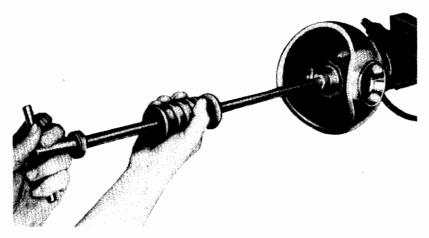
Axle Shaft Oil Seal Removal (Puller 41-P-2957)
